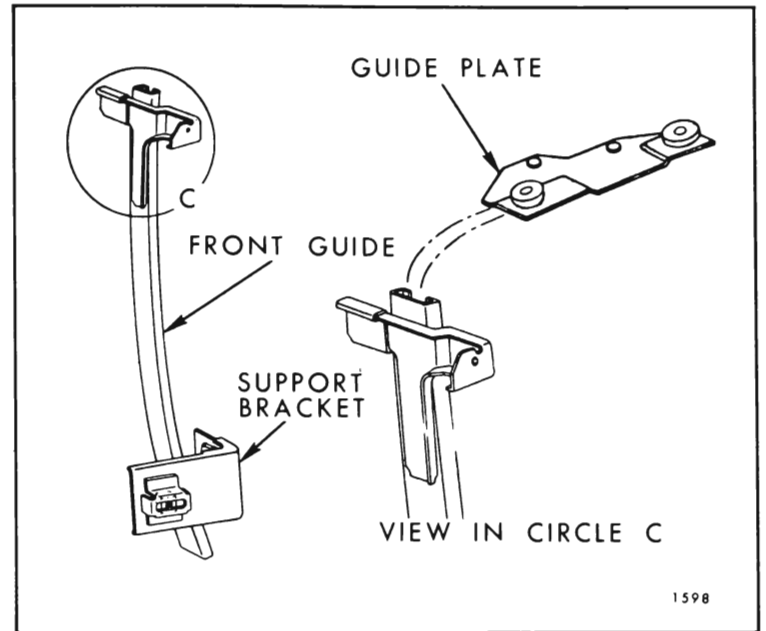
Front Guide and Guide Plate - 68069-68169 Styles
